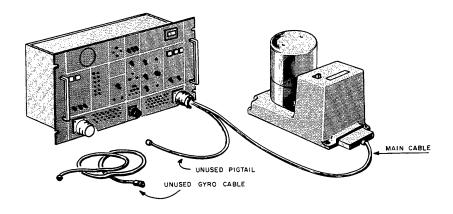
A TESTER HOOK-UP, ASSEMBLED UNIT
